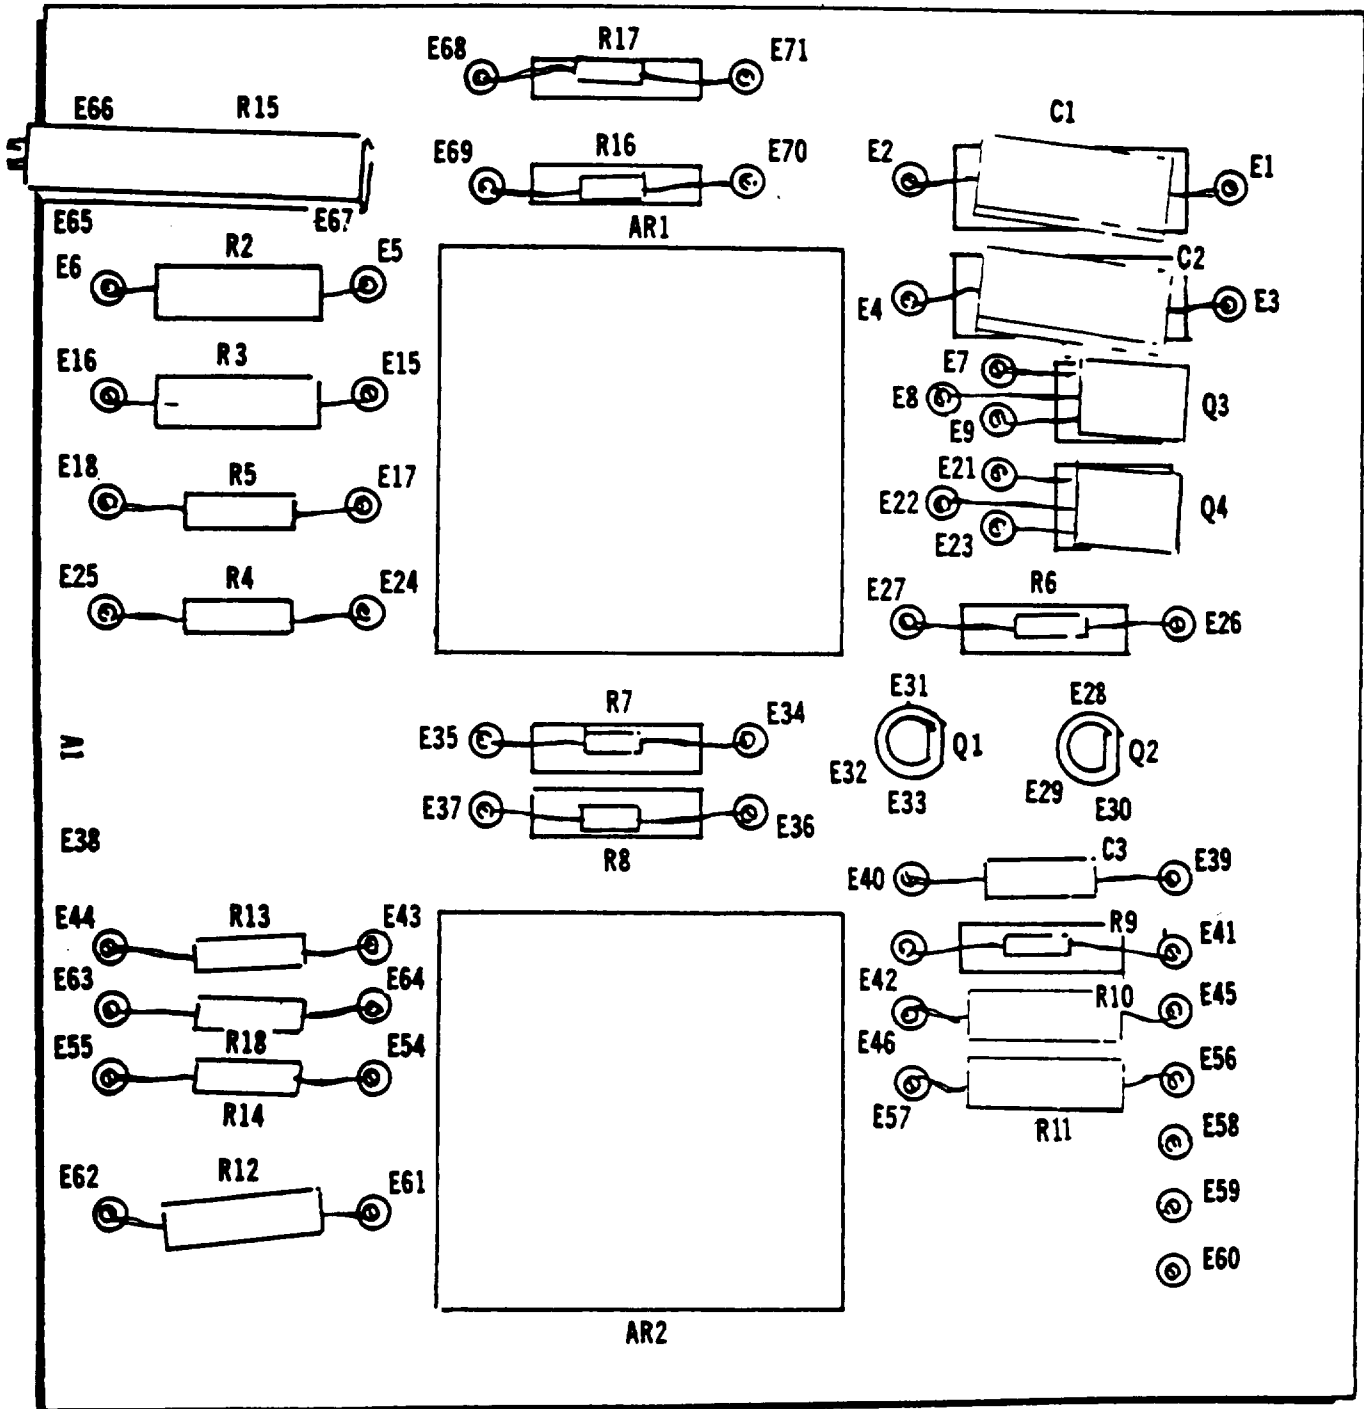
Component Board A-1, Rear View (Sheet 2 of 2)
